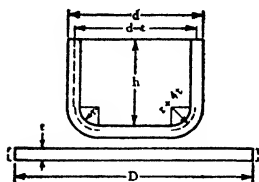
Cross-section of shell and blank showing essential dimensions for computations.
